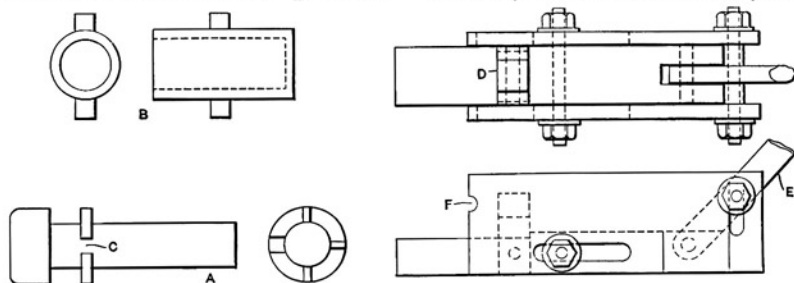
Mandrel and Fixture used for Babbitting Bearing B
